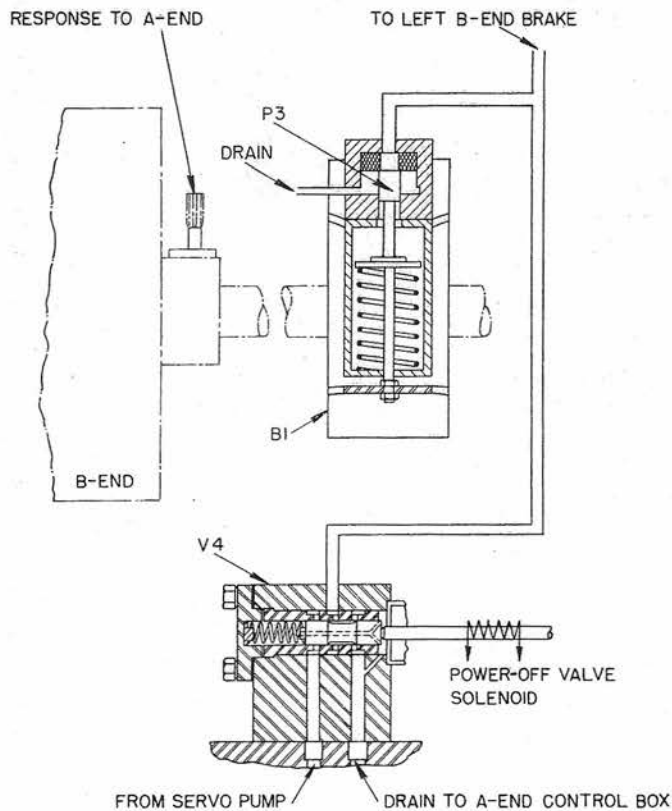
Training Gear Circuit Diagram (No. Pump Co.)
